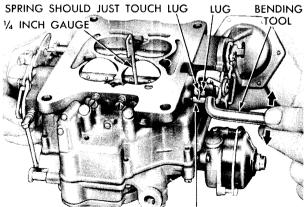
Checking Opening of Secondary Throttle Valves (Step 2)
